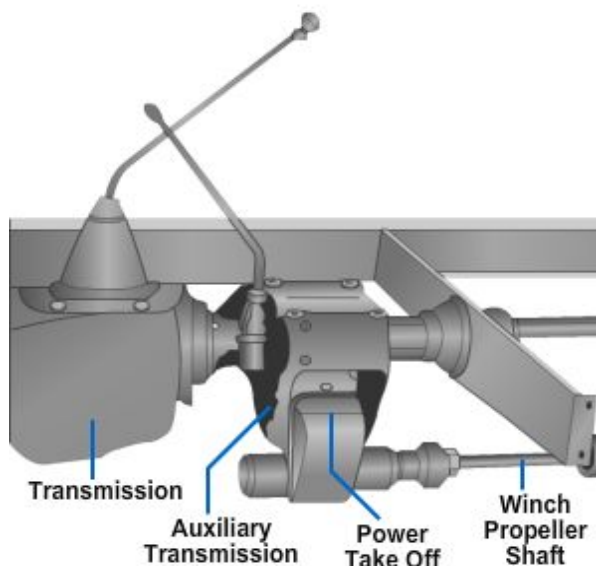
Single-speed, single-gear power takeoff installation.
